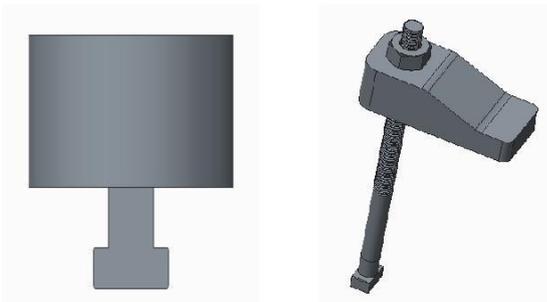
(a) Supporting Block-Side View (b) Rockwell Clamp -Isometric View
